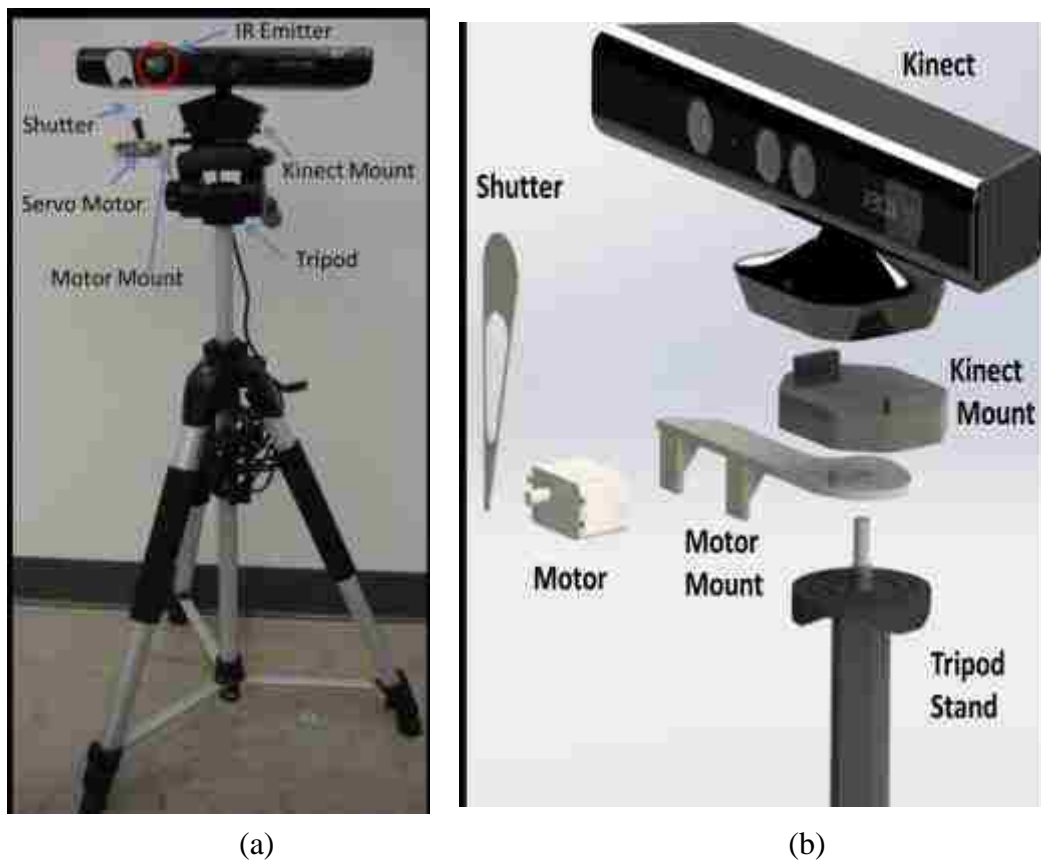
Shutter design: (a) assembly and (b) exploded view
